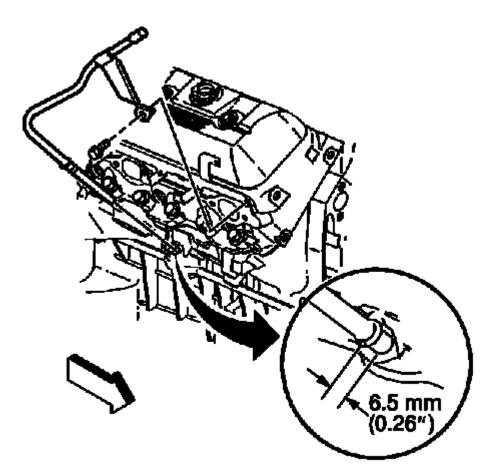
Applying Sealant Around Oil Level Indicator Tube Courtesy of GENERAL MOTORS CORP.
